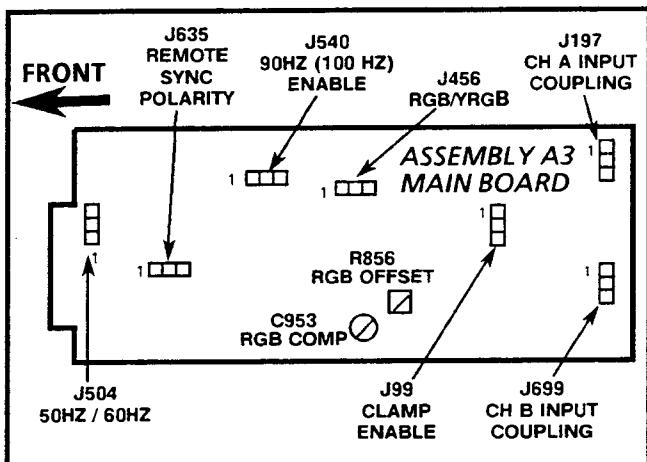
Plug jumper locations and rgb adjustments. Pin 1 is denoted by a small numeral 1 next to the plug jumper symbol.
